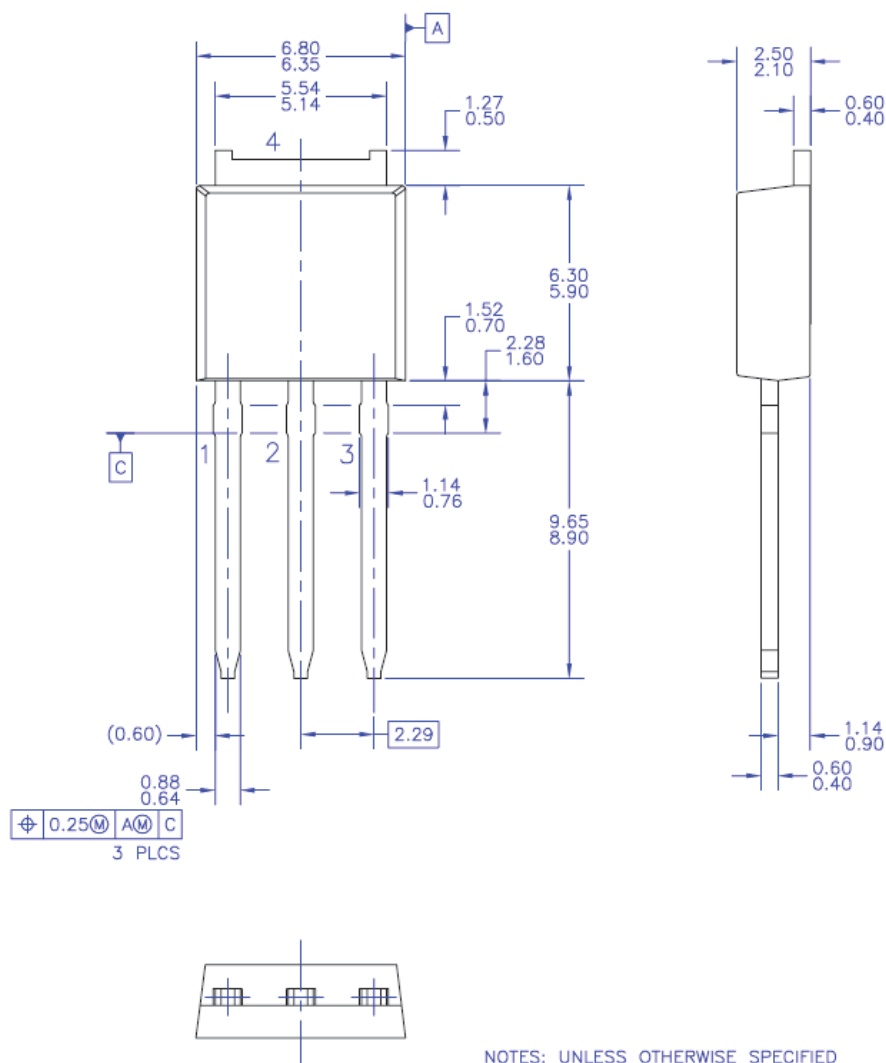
TO251 (I-PAK), Molded, 3-Lead
